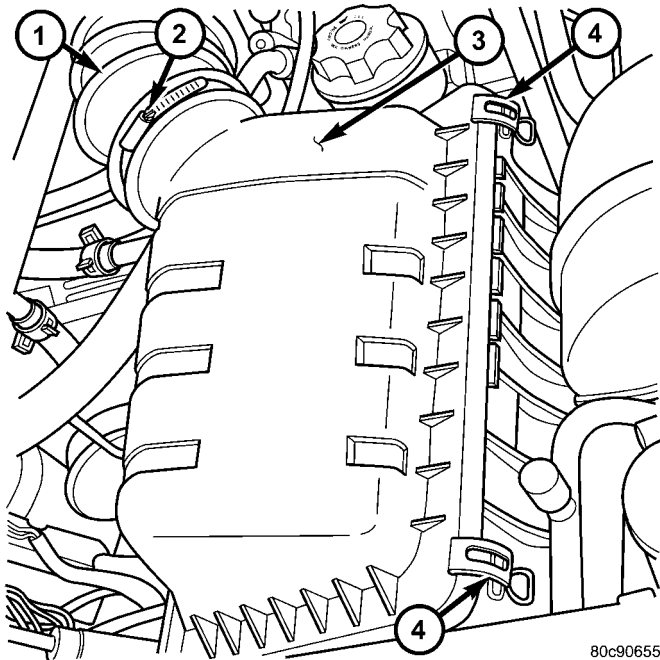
AIR CLEANER ELEMENT - 3.7L
